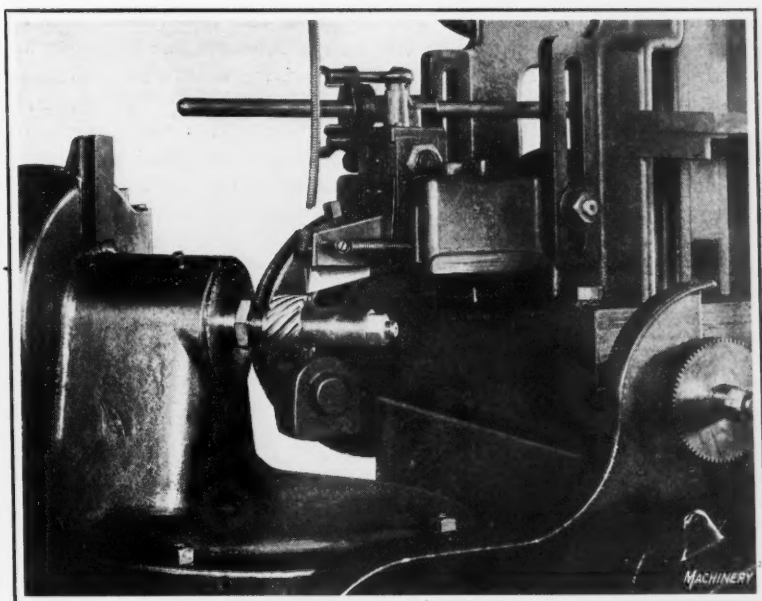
Cutting Helical Gears on a Shaper of Horizontal Design
